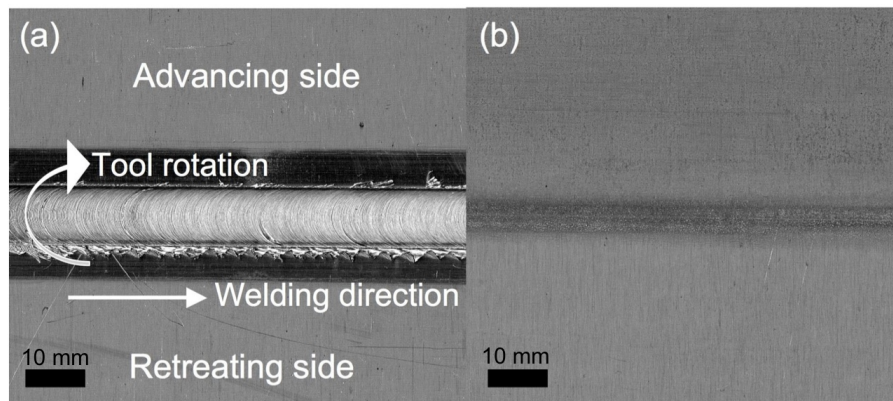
Macrographs of AZ31 FSWeld structure (a) top surface and (b) bottom surface.
